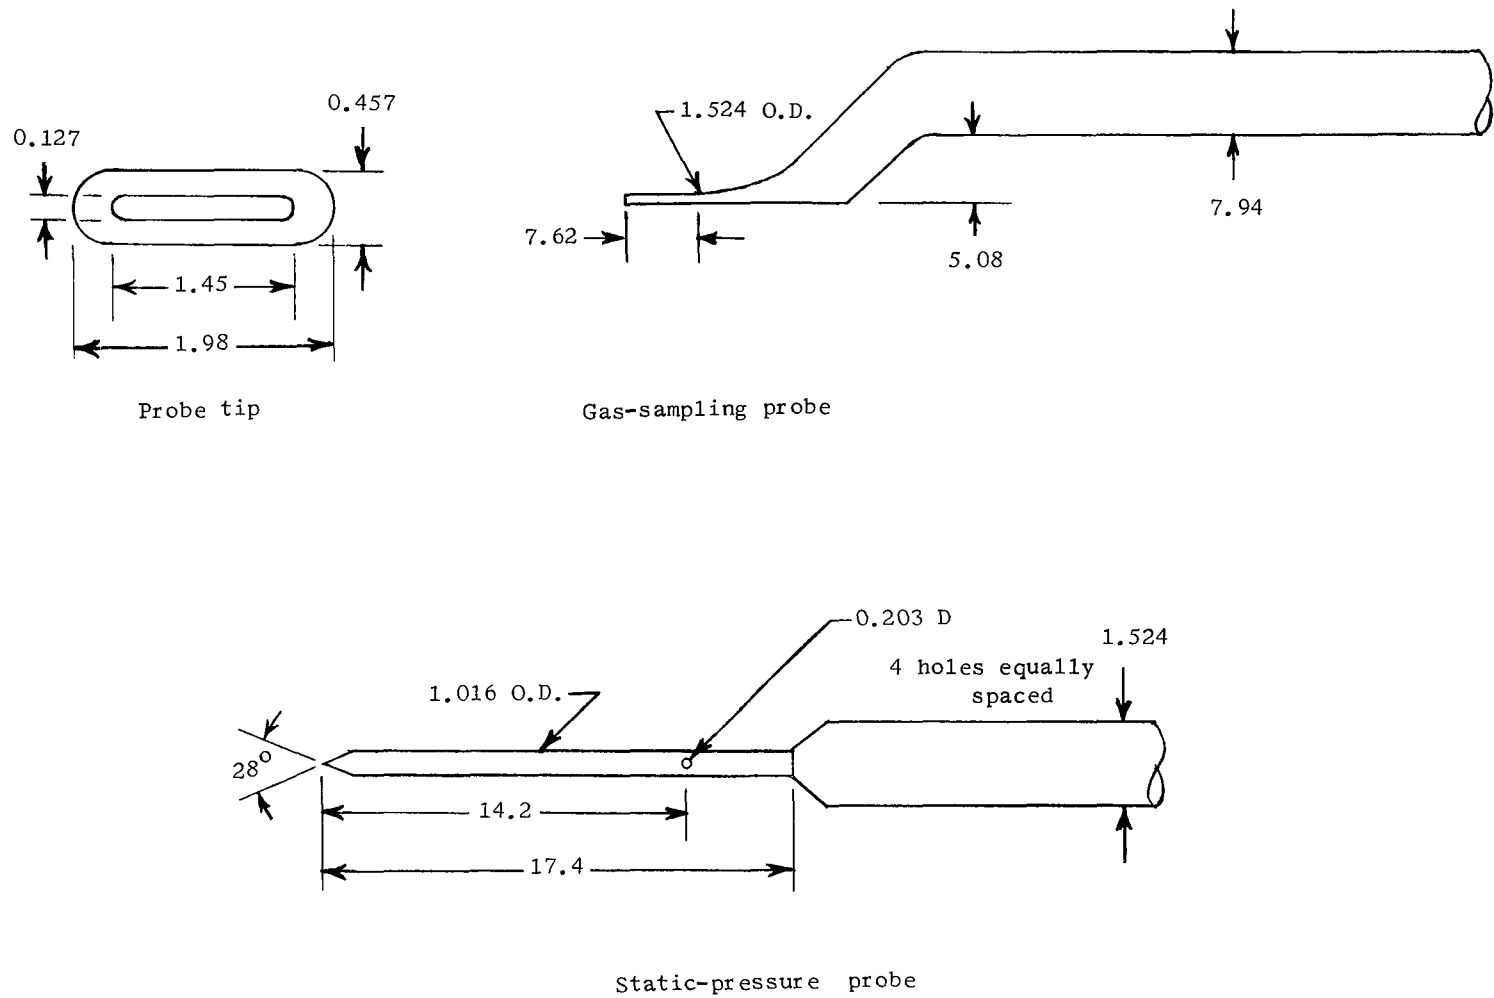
Survey-probe design. All dimensions are in millimeters.
